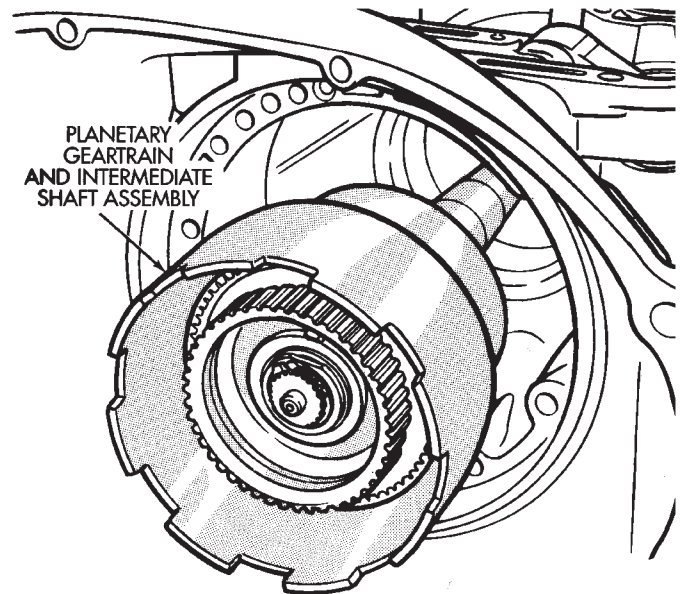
Removing Planetary Geartrain And Intermediate Shaft Assembly
